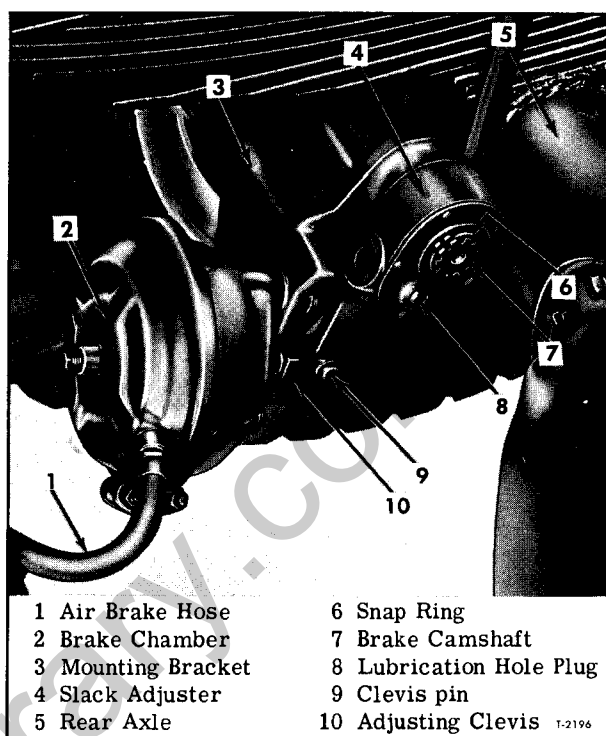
Brake Chamber and Slack Adjuster Installed (Rear)
